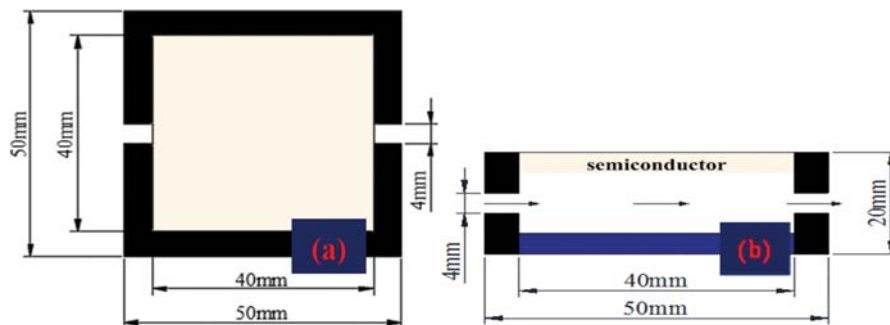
Particulars of the heat sink, (a) plan elevation, (b) front elevation.
